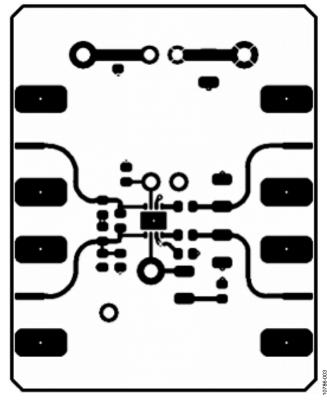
ADA4433-1BCP-EBZ Board Layout Pattern, Primary Side
